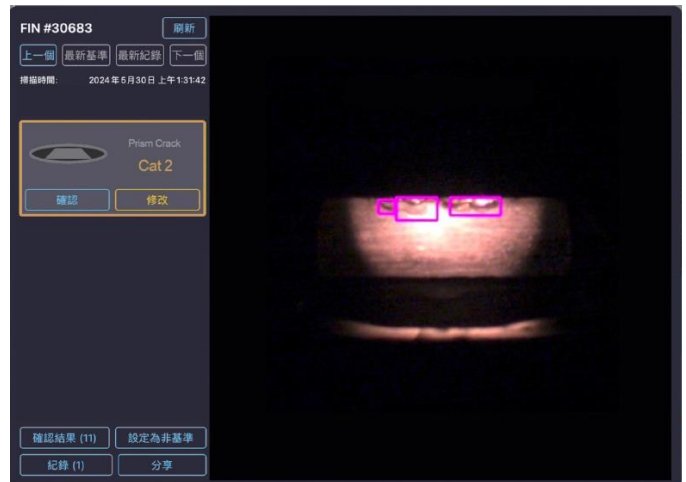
The Detected Prism Cracks were highlighted in the Operator Mobile Device. The Severity of the Prism Cracks will be categorized into Cat 1, 2, or 3
